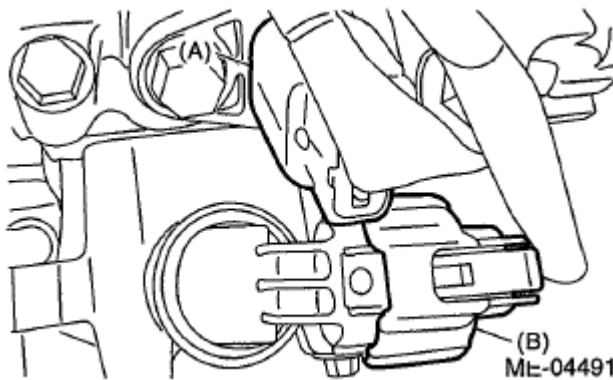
Disconnecting Exhaust Oil Flow Control Solenoid Valve Connector
